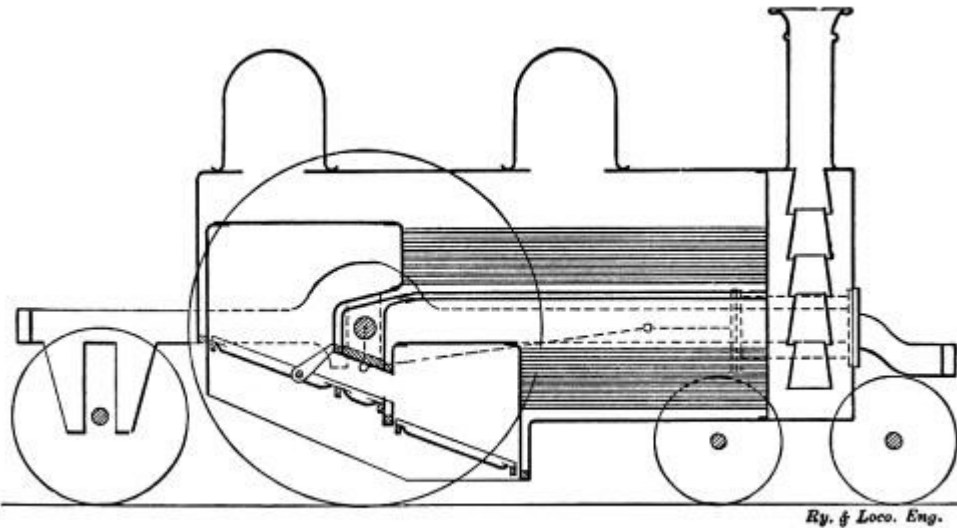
COLBURN'S DESIGN OF LOCOMOTIVE DOUBLE BOILERS, WITH DRIVING AXLE BETWEEN.
